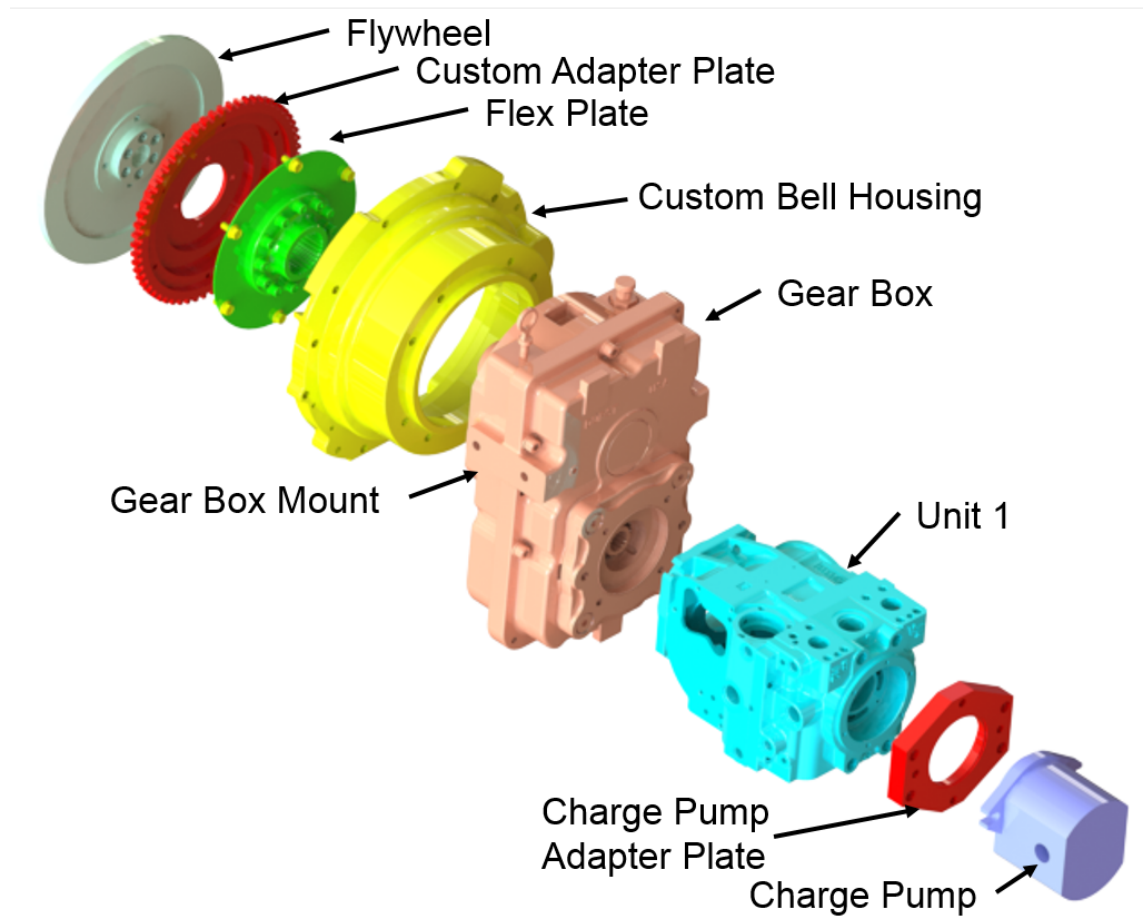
Exploded view of engine flywheel to unit 1 assembly.
